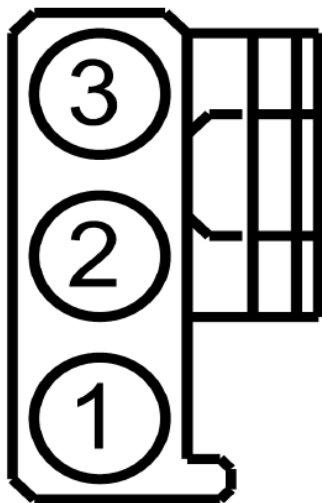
Right Rear Wheel Speed Sensor Connector End View (C426)
